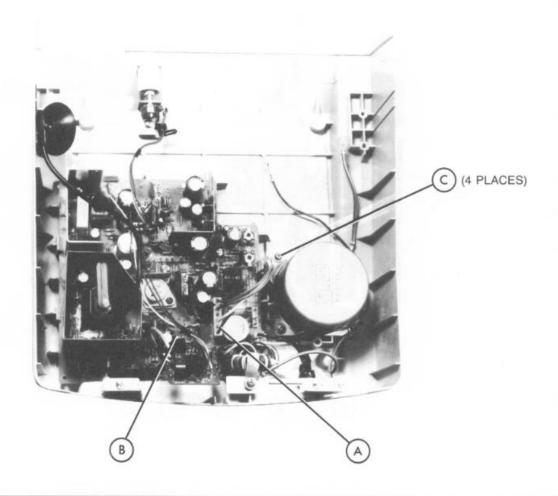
POWER TRANSFORMER REMOVAL/REPLACEMENT
